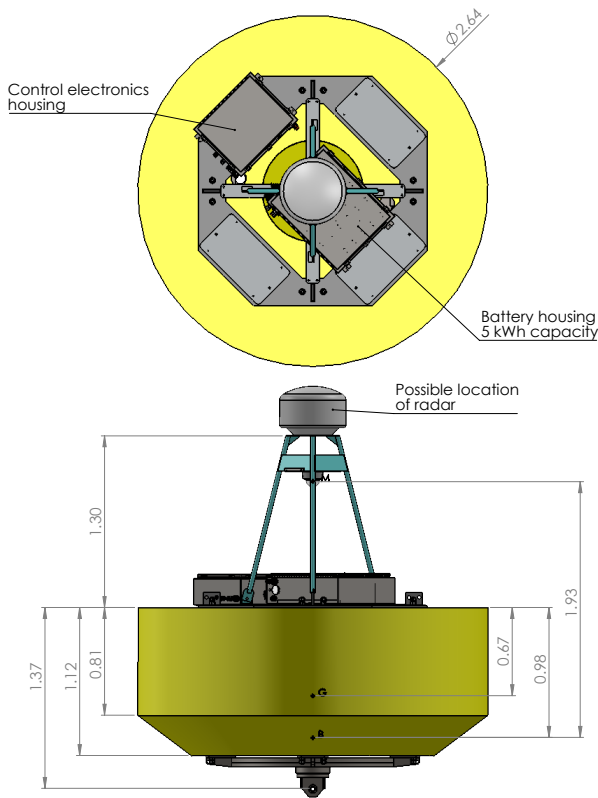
MBARI-WEC buoy layout drawing with top and side views.
